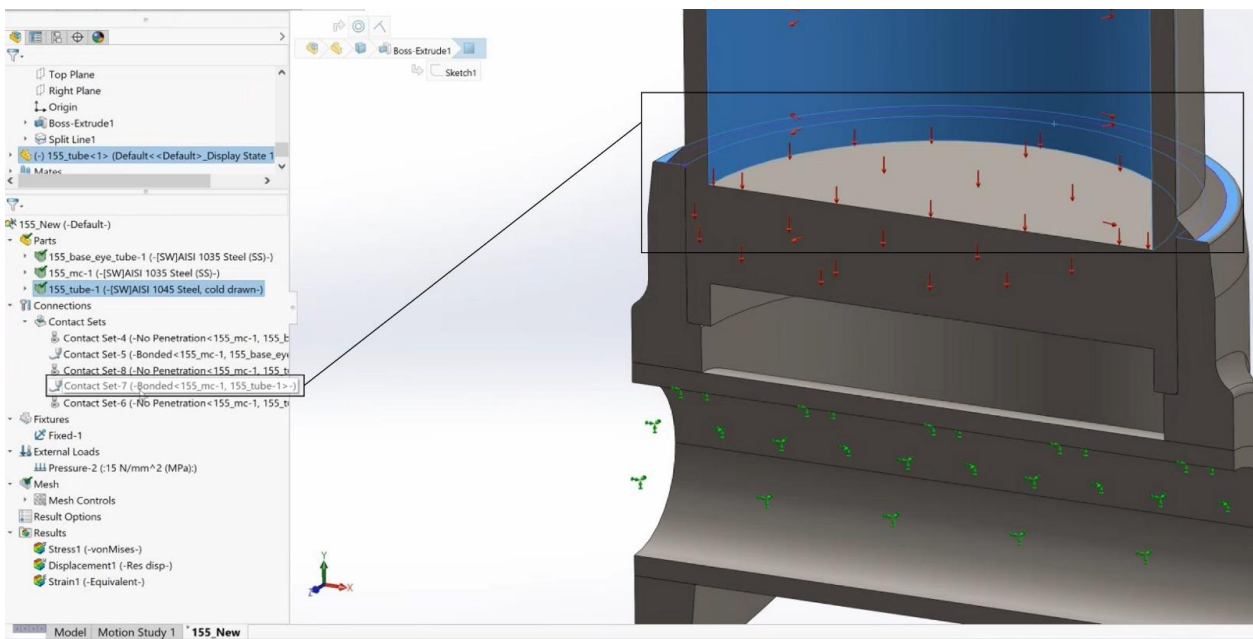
Bonding contact between the base eye and the cylinder barrel at the welding point
